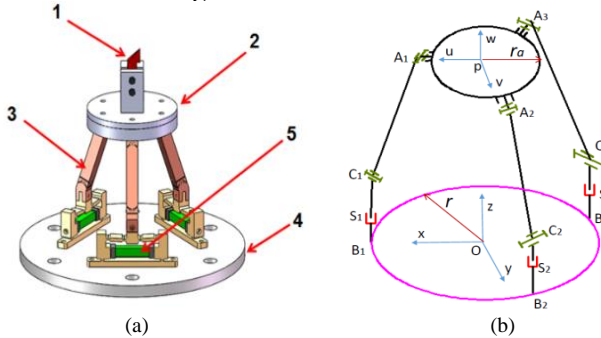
a) 3-PUU FTS mechanism. 1) Cutting tool; 2) The upper platform; 3) The branched chains; 4) The lower platform; 5) The piezoelectric actuator; b) Kinematics mathematical modeling of the 3-PUU FTS.
